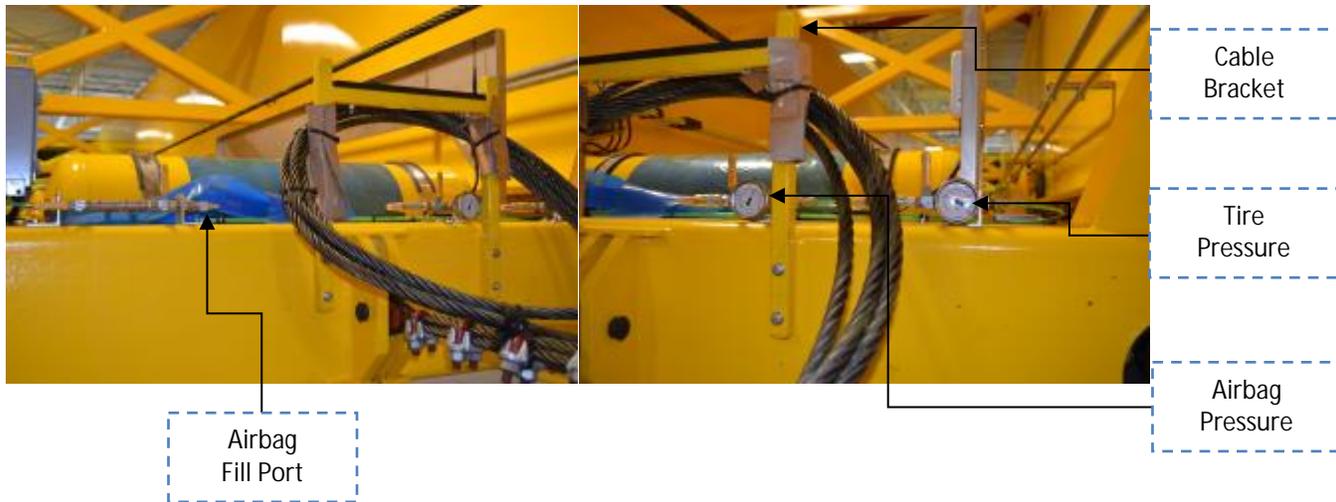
End View of the Upper Carriage Assembly Highlighting Pneumatic items.
